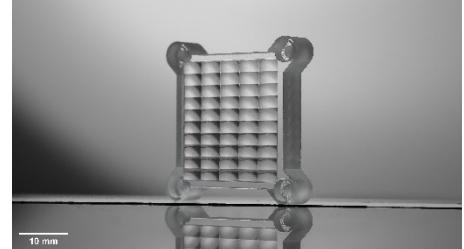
Micro-lens array machined with combination of TDM and BUM processing methods (Courtesy of FTMC)
